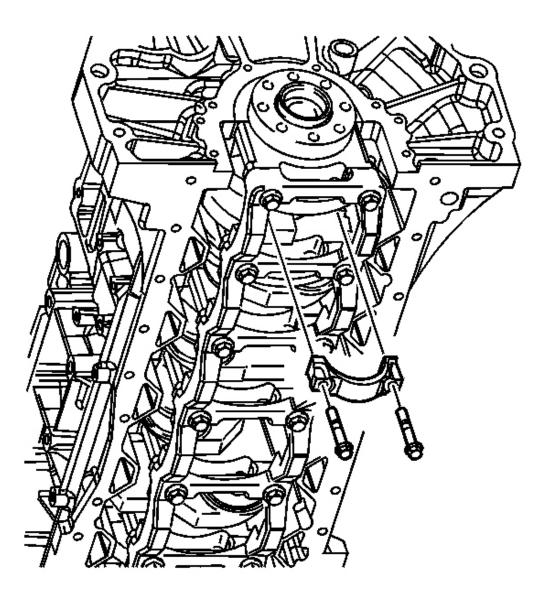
View Of Connecting Rod, Cap & Bolts Courtesy of GENERAL MOTORS CORP.
